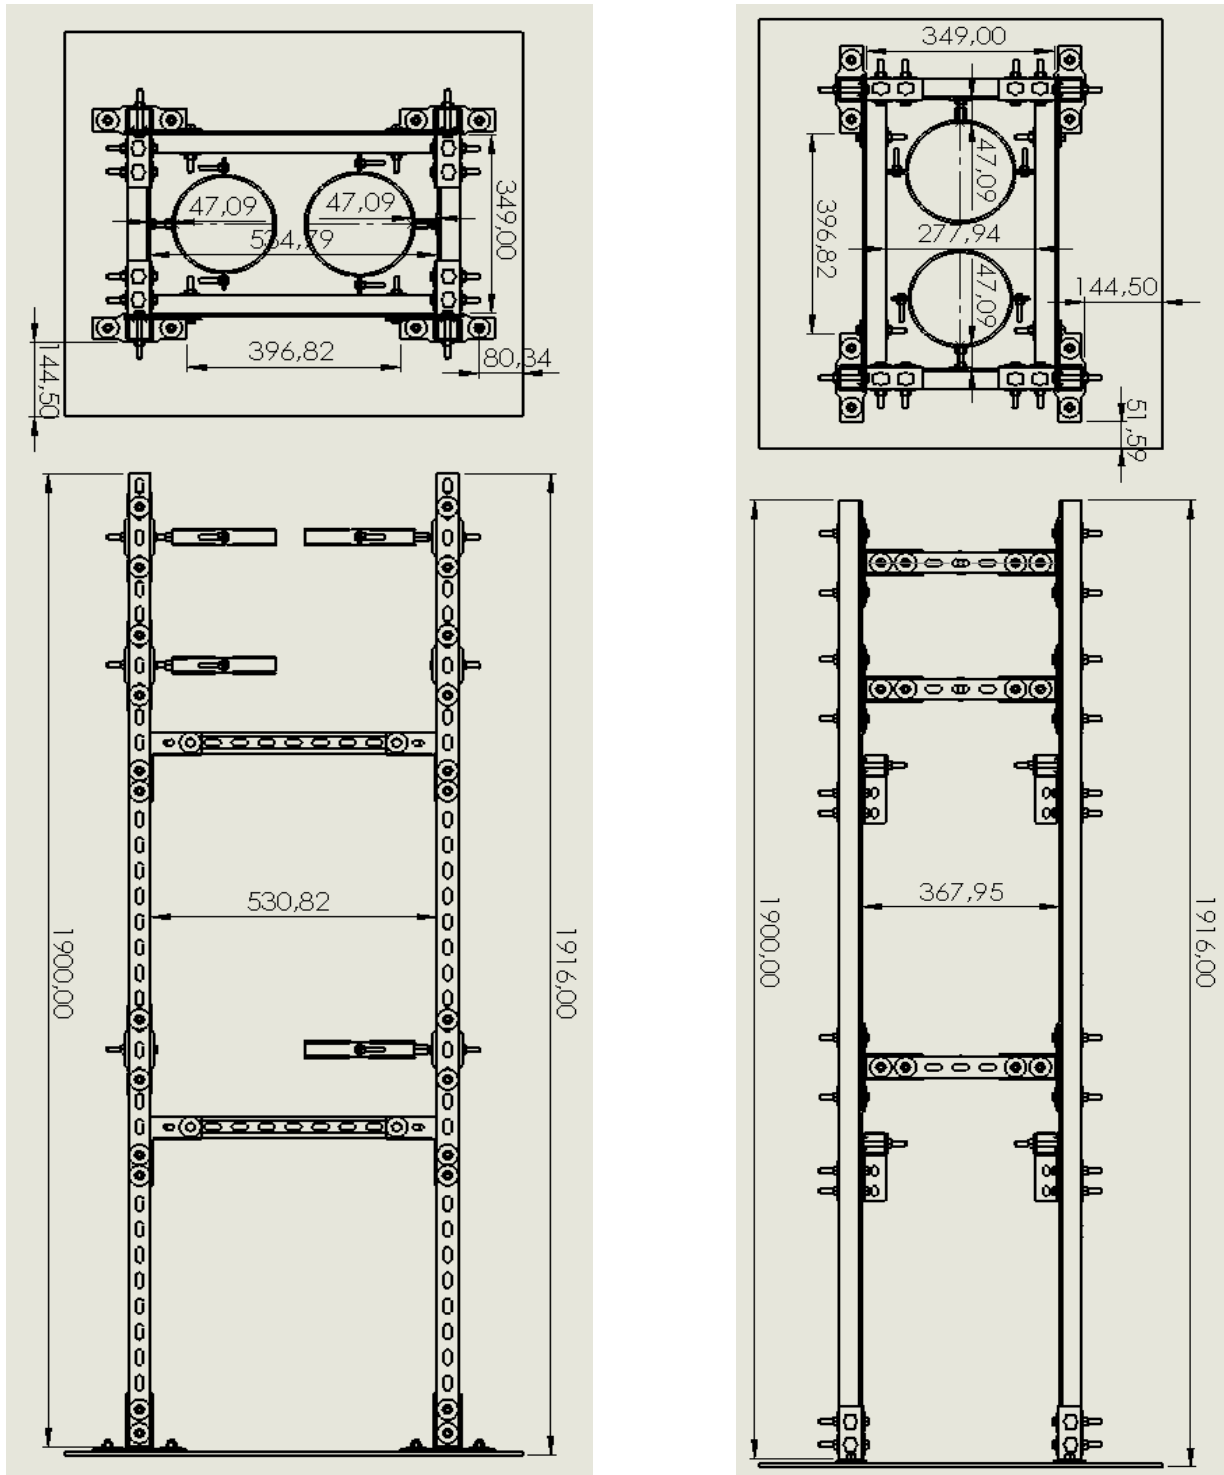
Fluidic line test bench assembly orthogonal projections.
